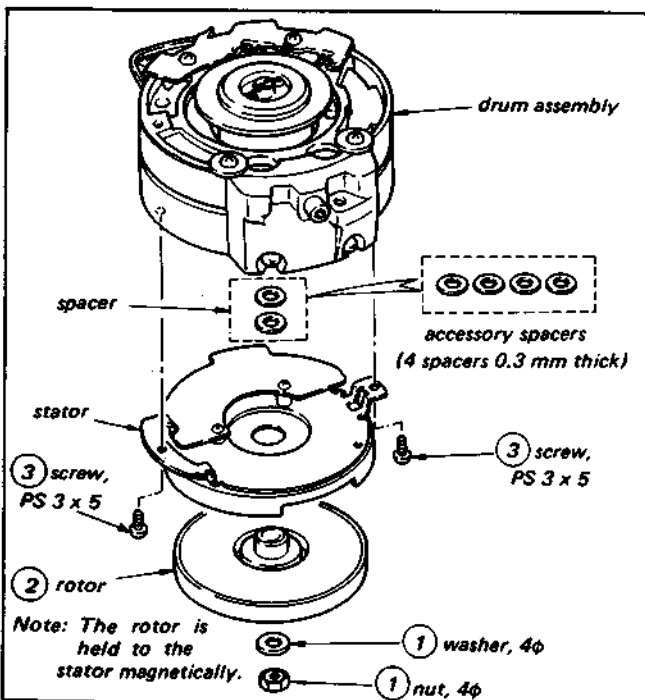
Removal of the stator and rotor when replacing the drum
